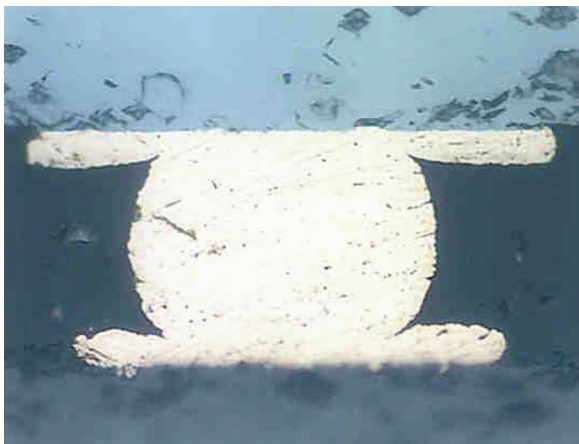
Au bump after thermocompression bonding (cross-sectional view).
